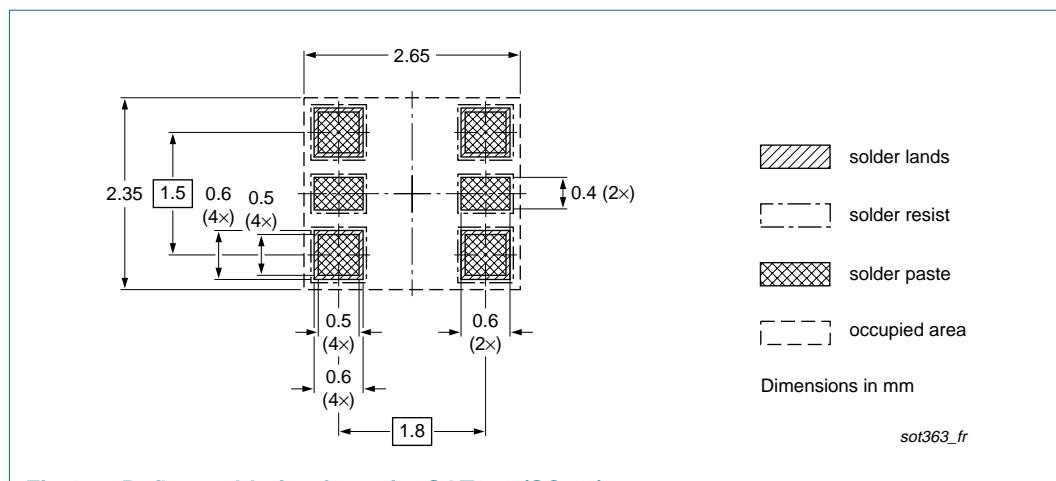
Reflow soldering footprint SOT363 (SC-88)
